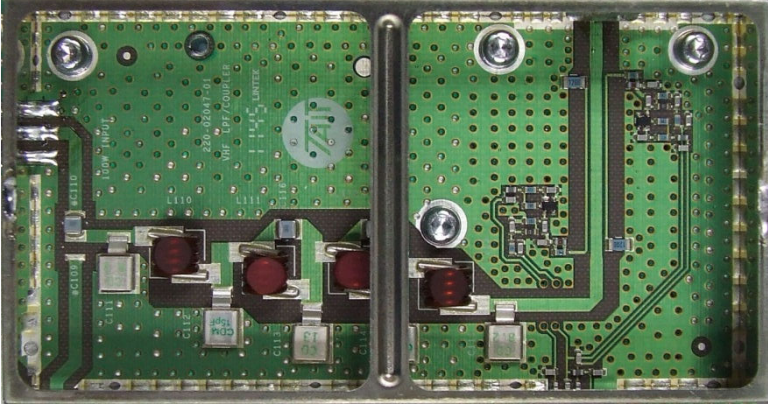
Power Amplifier Combiner PCB – Top & Bottom
